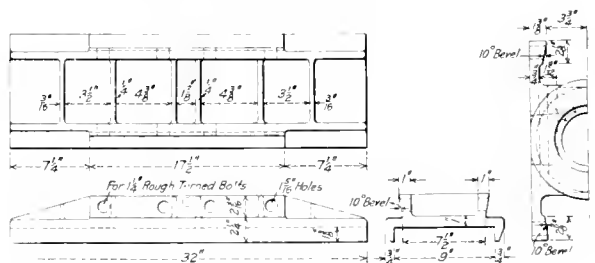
Shoe Fastening as Applied to Crosshead with Piston Rod Held by a Key
